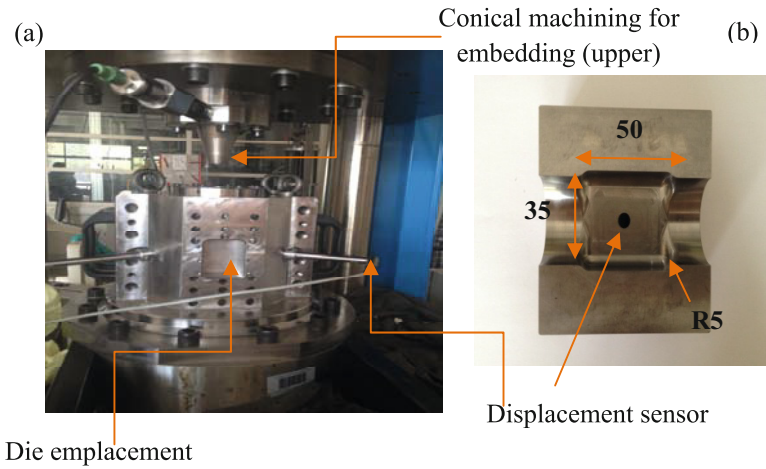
The modular tool installed on the press at FEMTO-ST lab (a) and the main dimensions of the square section die (b)
